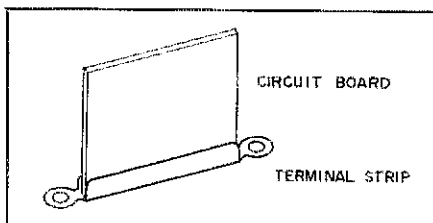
A terminal-strip mounting bracket is used to hold a small circuit board.
